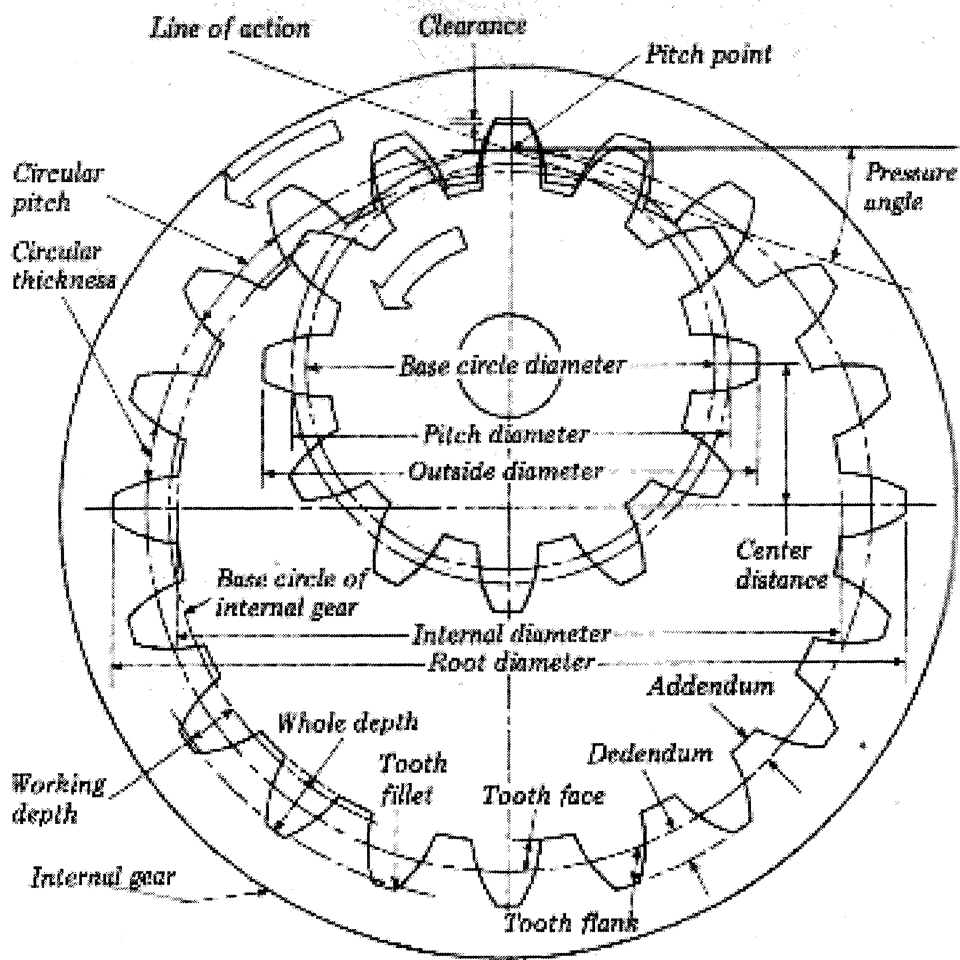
Fundamental spur gear geometry and features for an internal gear mesh [12].
